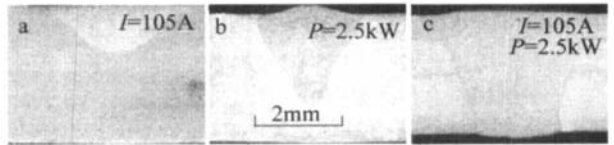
Cross sectional photos of laser arc and hybrid welds
